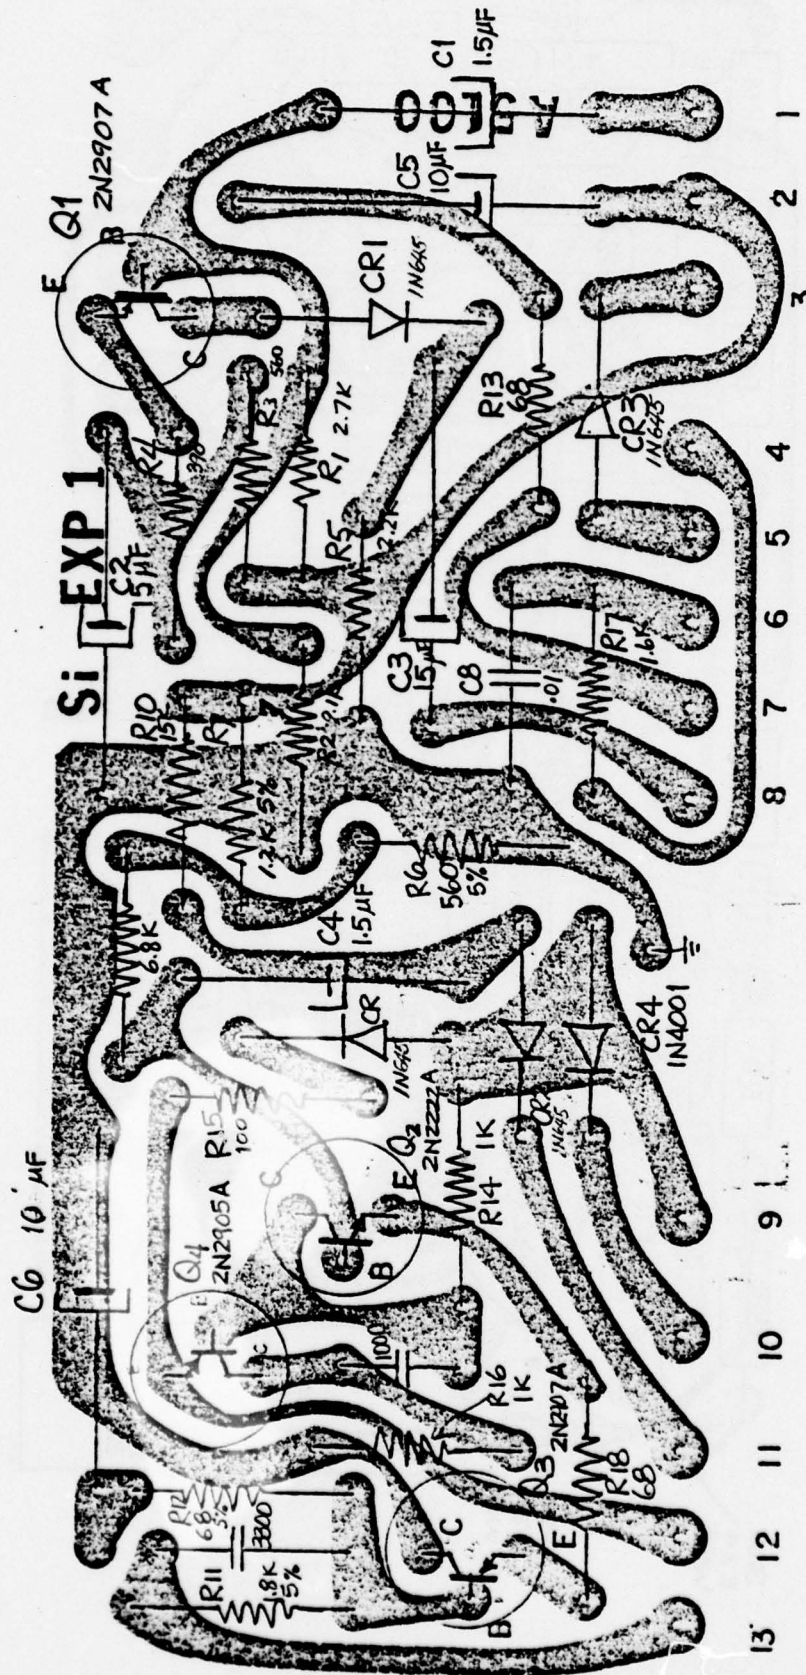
P.C. BOARD LAYOUT FOR THE A5100A AUDIO AMPLIFIER ASSEMBLY
